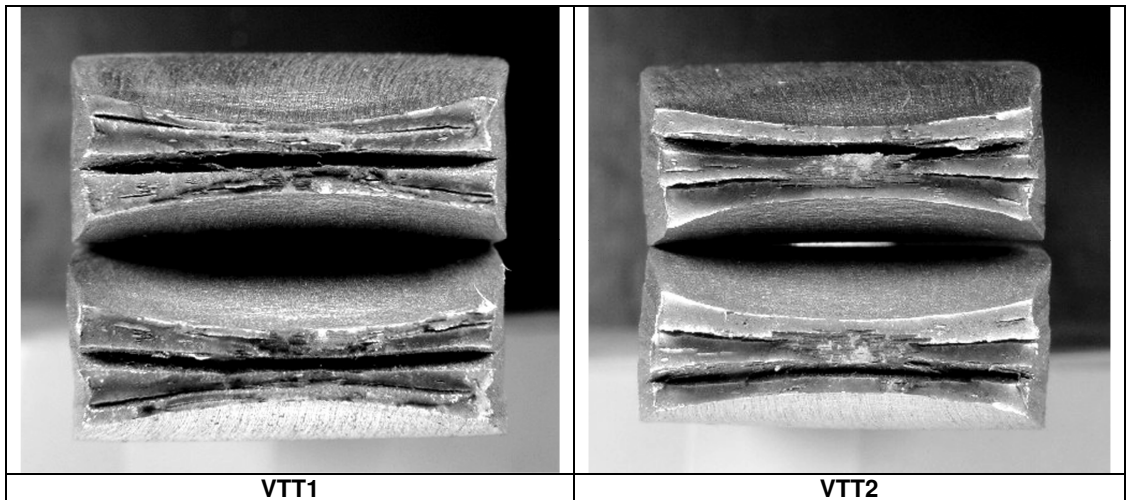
Fractographs of VTT1 and VTT2 specimens.
